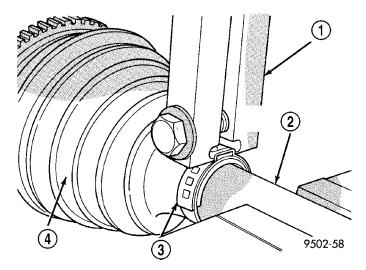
Crimping Tool Installed on Sealing Boot Clamp
